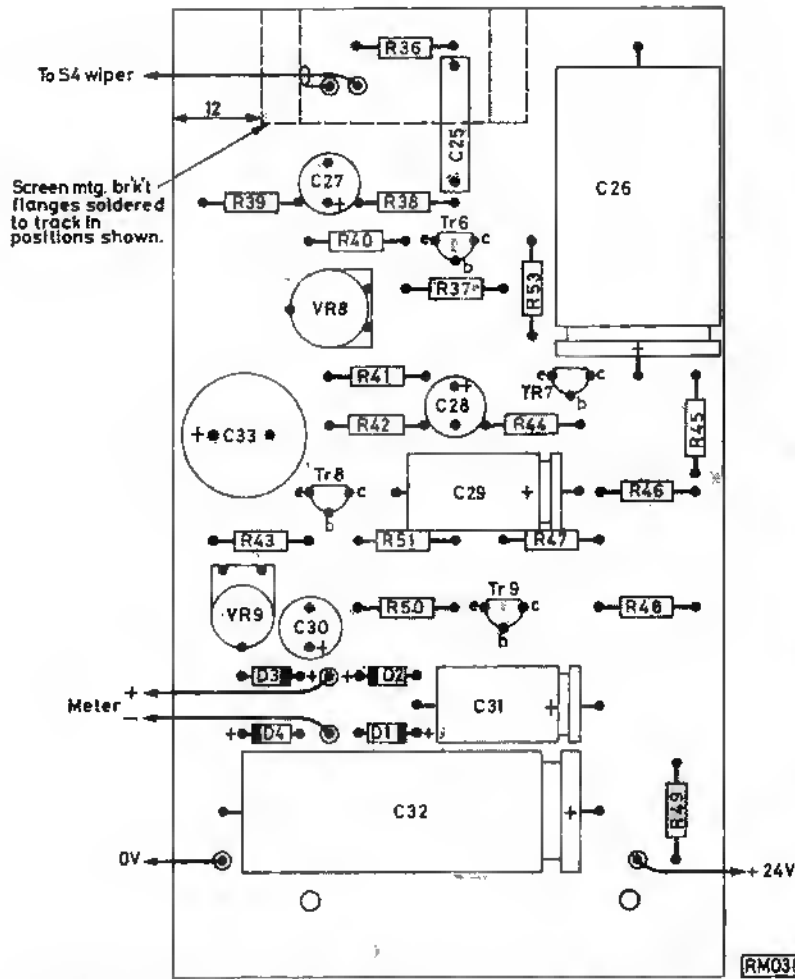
Component placement drawing for the Meter Circuit p.c.b. (Board 2). Note the small finplate bracket soldered to the earth track
